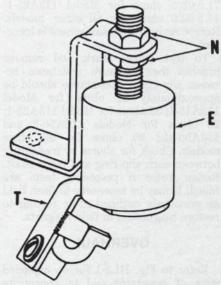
Loadamatic® Automatic Idle Control is adjusted by turning nuts (N) until bottom of electromagnet (E) is parallel with throttle arm (T). Do not bend throttle arm or electromagnet bracket.
